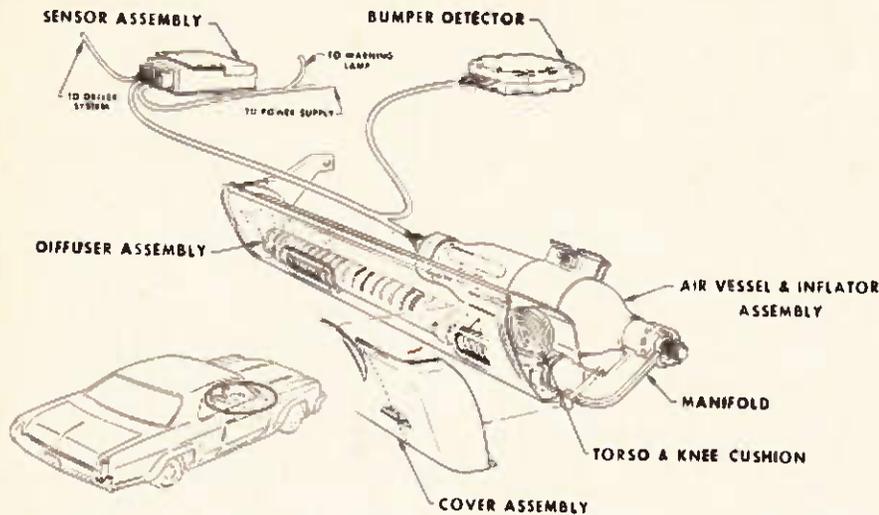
Accelerometers mounted in the bumper and on the fire wall are used to trigger the developmental air bag of GM.
